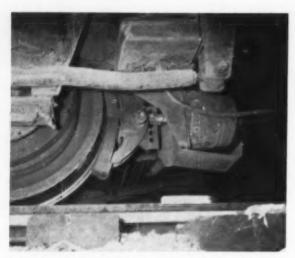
The unit-brake mechanism which can be used with the No. 26 brake incorporates the brake cylinder, slack adjuster, and required foundation brake parts in a compact space or enclosure
